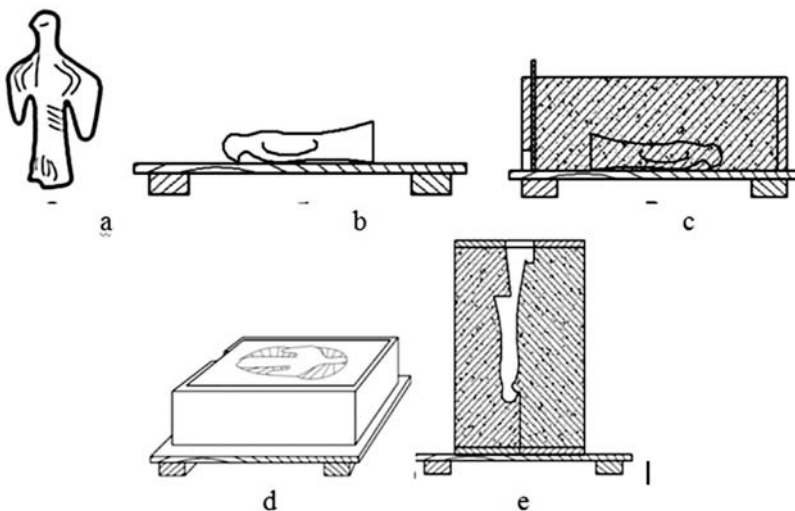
The scheme of making molds (a - model, b - model set out at moulding board, c - the lower half of the mold, d- the lower half of the mold with a carved figured parting plane, e - The assembled mold)
